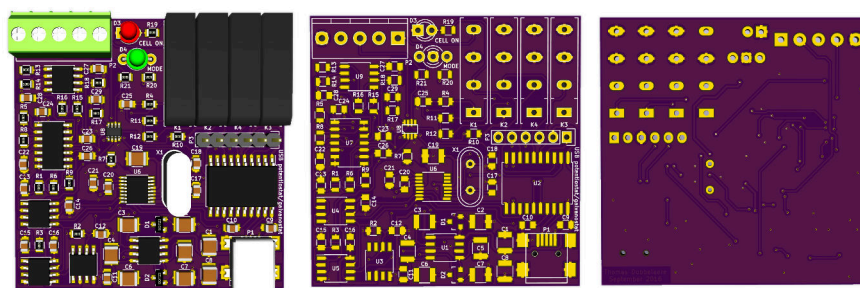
3D renders of the printed circuit board design, showing the populated board (left), the unpopulated board’s front side (middle) and the unpopulated board’s back side (right).
